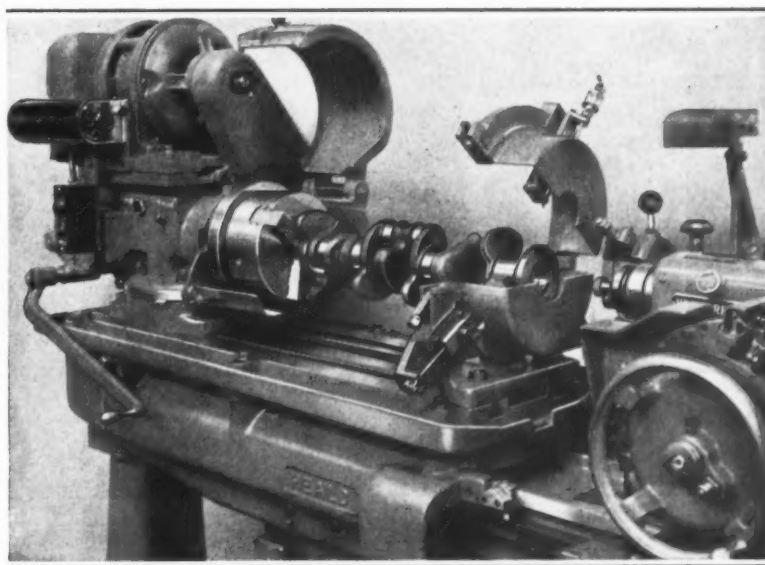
Grinding a Blind Hole in the Flange End of a Crankshaft on a Regular Internal Grinding Machine Equipped with an Extended Bridge and a Steadyrest
